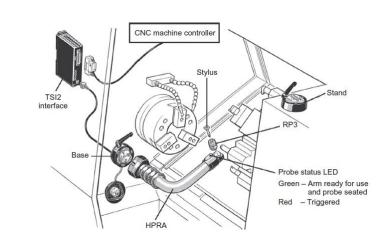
HPRA removable arm on a horizontal lathe. *From Renishaw.* (Grzesik, 2017a)
